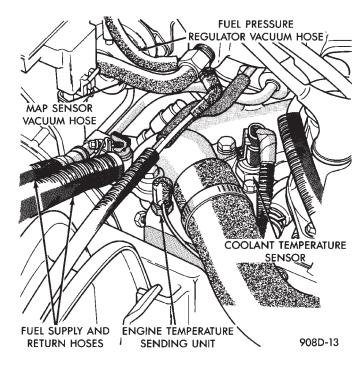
Coolant Temperature Sensor—3.0L Engine IGNITION COIL—2.5L TBI ENGINES
